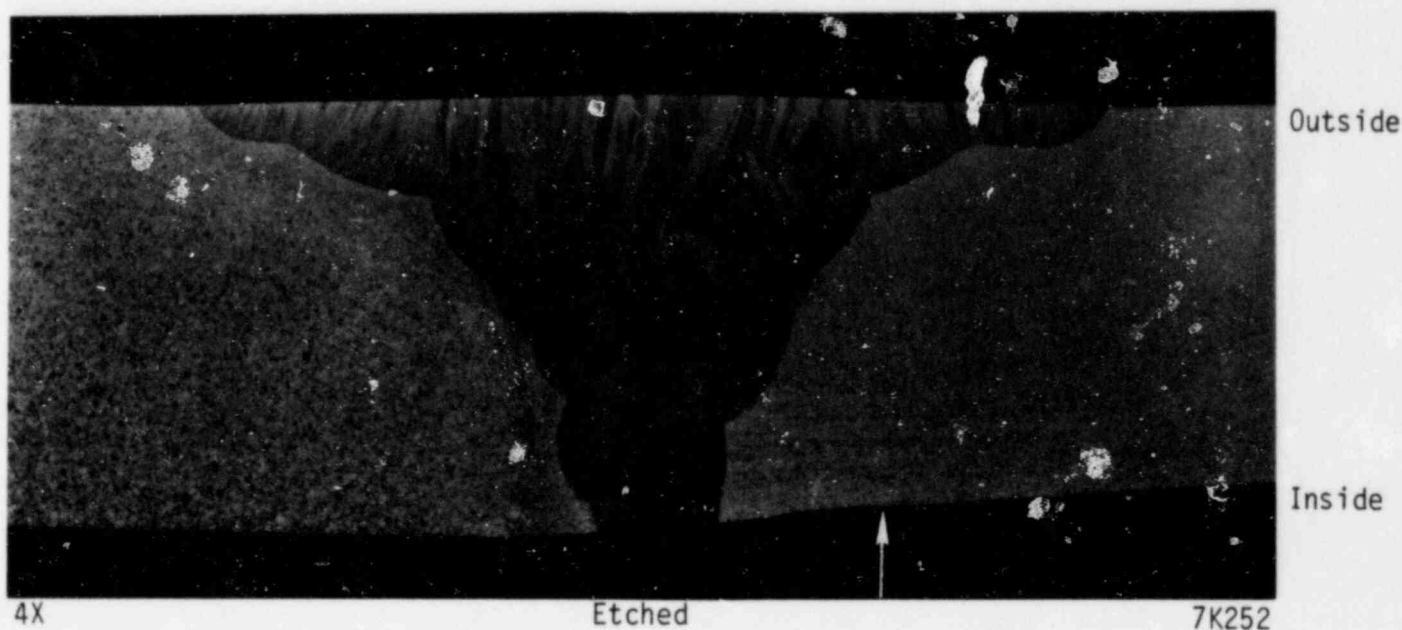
CIRCUMFERENTIAL WELD BETWEEN THE ELBOW SECTION (LEFT) AND THE STRAIGHT SECTION (RIGHT) OF THE TYPE 304 STAINLESS STEEL SCHEDULE 80 PIPE
